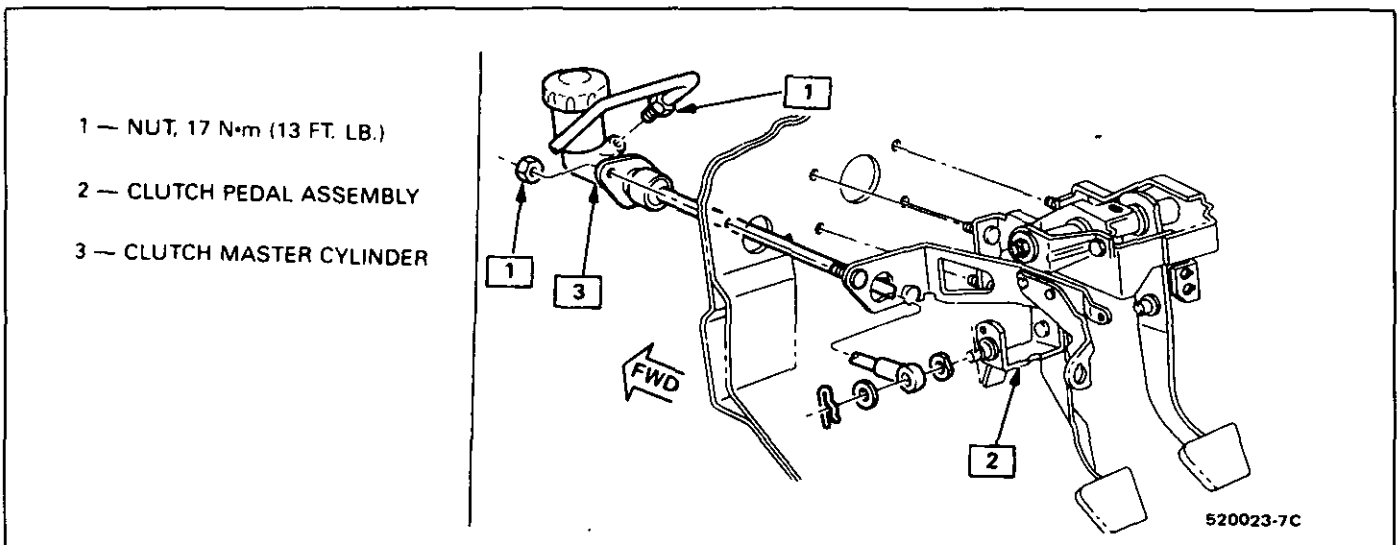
C-5 Clutch Pedal & Master Cylinder Assembly
